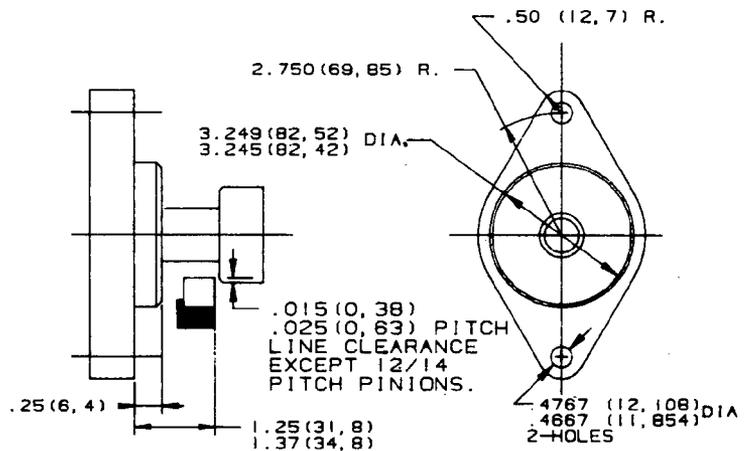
TYPE NO. 5 MOUNTING FLANGE LIGHT DUTY
